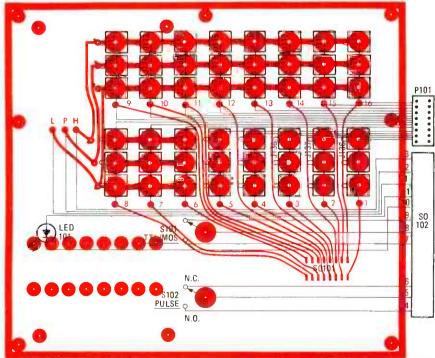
EACH TRIO OF JACKS is connected to the appropriate pin of the test socket SO101. Separate 11-wire cable goes to SO102, which mates with P102.
